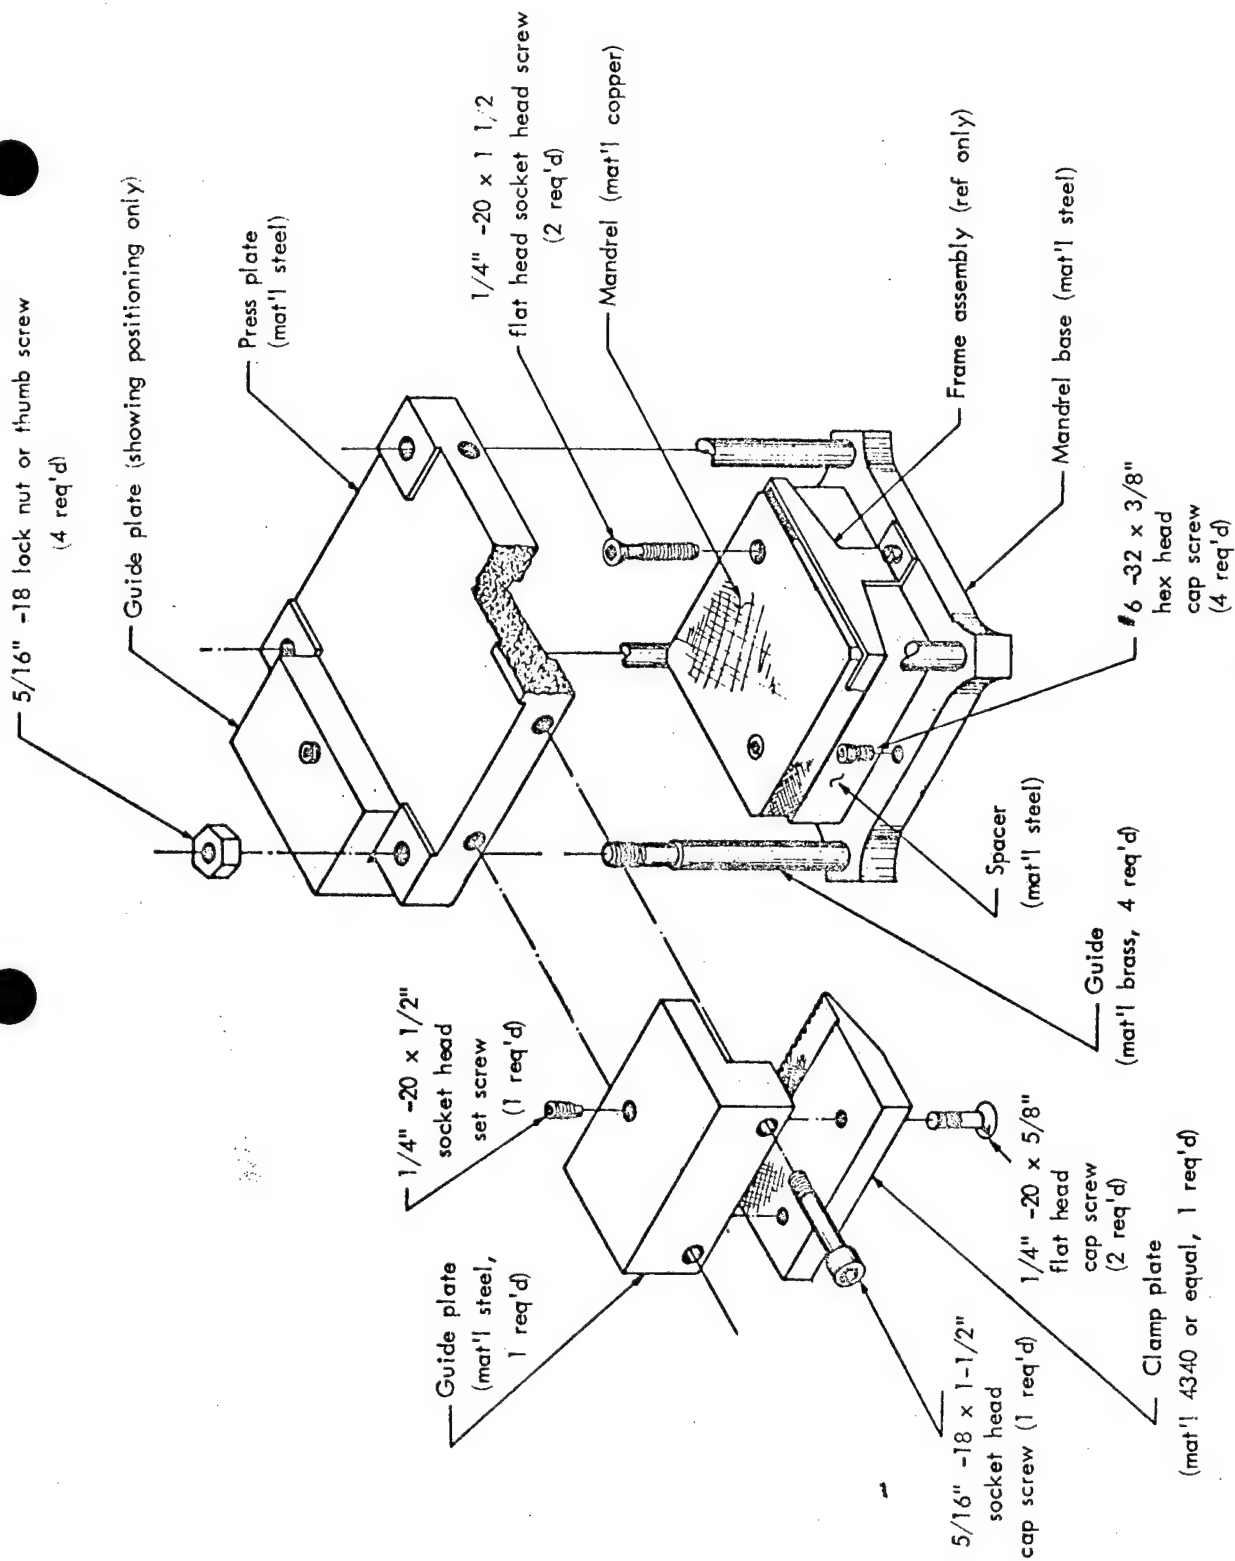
Detail of forming and welding fixture for screen component.
